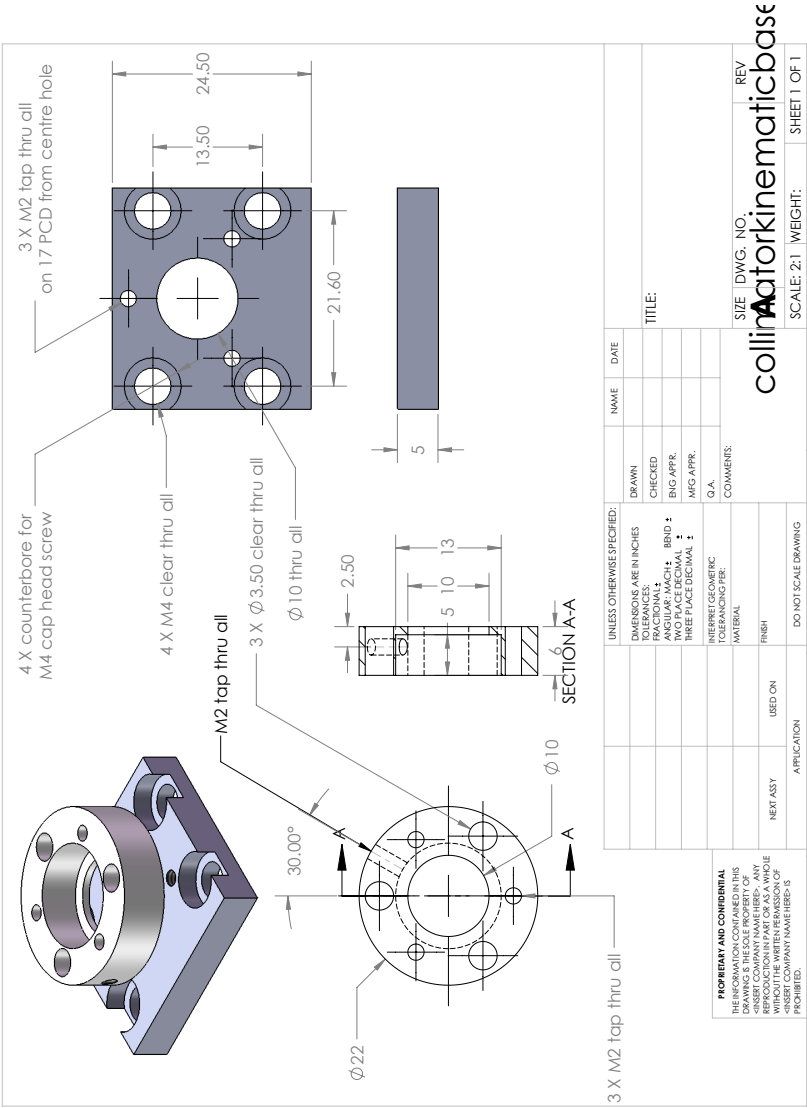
CAD drawing of collimator kinematic mount which screws onto the top of the front part.
